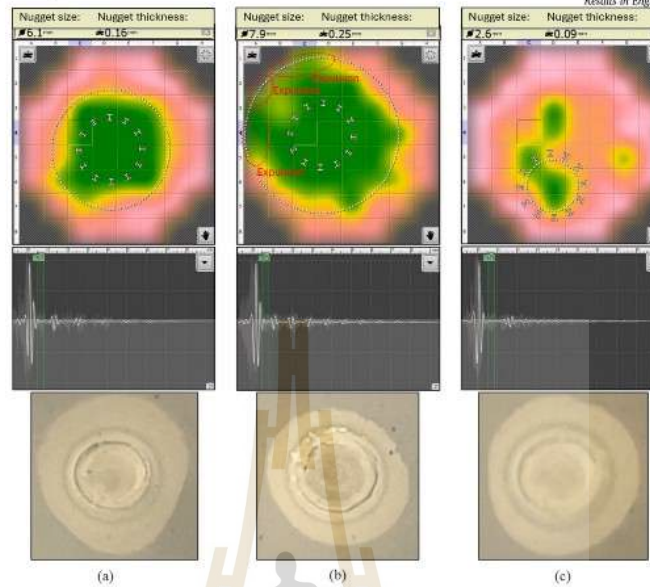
C-scan area for each weld quality. (a) Satisfy, (b) Expulsion, (c) Cold weld.
